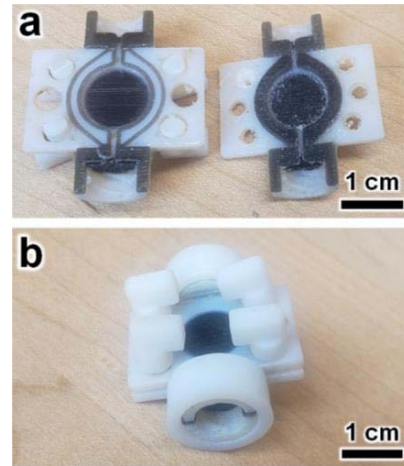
Fabrication results for PolyJet 3D printing-based additive assembly. (a) Printed components following support material removal. *Black Material* = Agilus30 (*Flexible*); *White Material* = VeroWhite (*Rigid*); Fastener extrusions removed. (b) Microfluidic capacitor following the additive assembly process.
